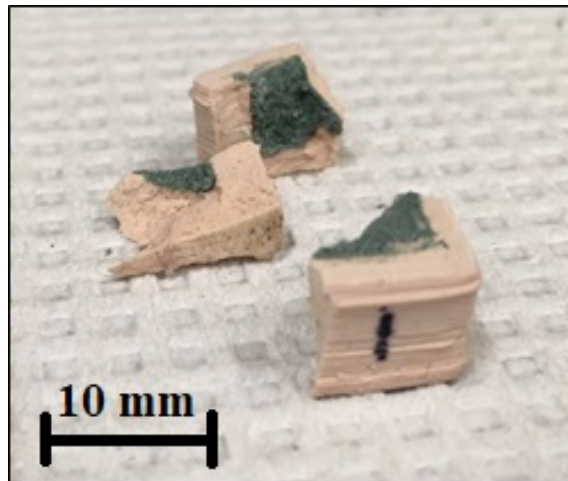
Part in VAP Printed Sculpey® Clay Mold
